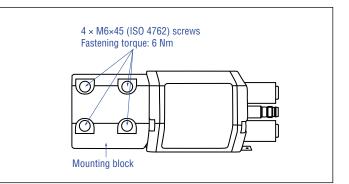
Mounting of RDV sensor electronics housing (example of bottom cable entry)
